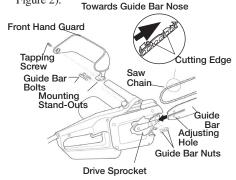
Assembling Guide Bar, Chain, and Hand Guard
